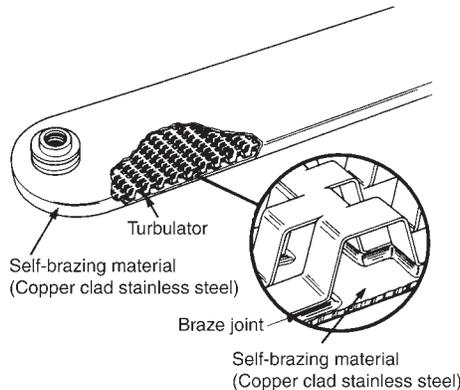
Heat exchanger fabricated using clad brazing ("self-brazing") materials
